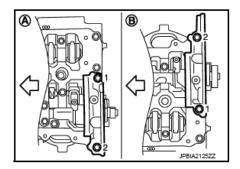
Actuator Bracket (Rear) Mounting Bolts Tightening Sequence
